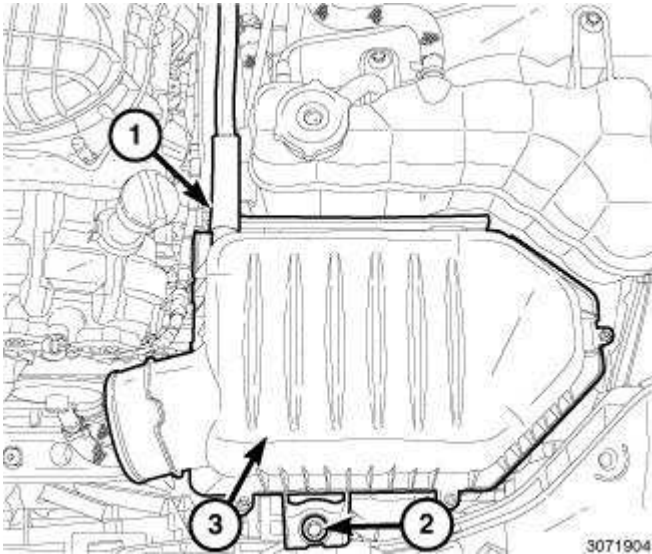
Fresh Air Makeup Hose, Air Cleaner Housing & Bolt
